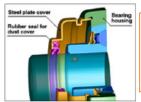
Fig.A Steel plate covered bearing unit Steel plate covered bearing unit
